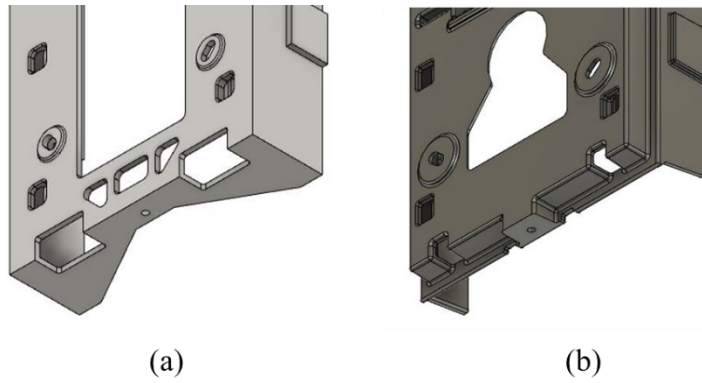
Detail of the bottom part of a) Prototype frame by GD and b) Commercial frame.
